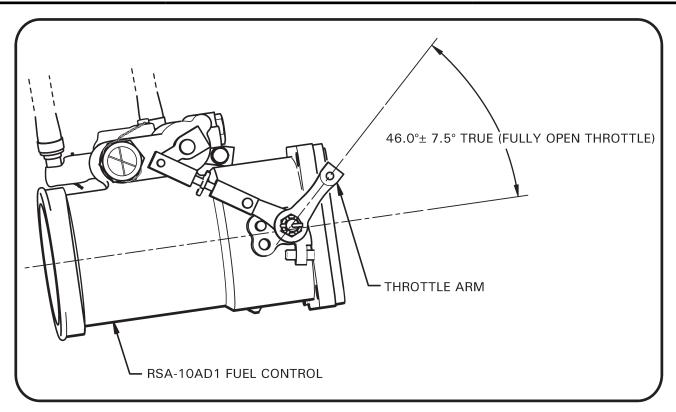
IO-540 THROTTLE ARM ADJUSTMENT
